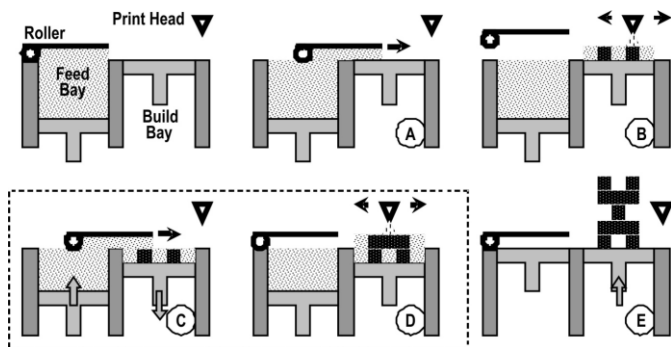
Schematic of 3D-printing process. A: the roller deposits a layer of powder on the build platform. B: ‘ink jet’ print head sprays liquid reactant onto powder layer, controlled by CAD software. C & D: build platform lowers by 1 layer thickness, next layer deposited and reactant printed; repeat as necessary. E: after all layers are printed, build platform ejects and unreacted powder is removed to excavate finished component.
